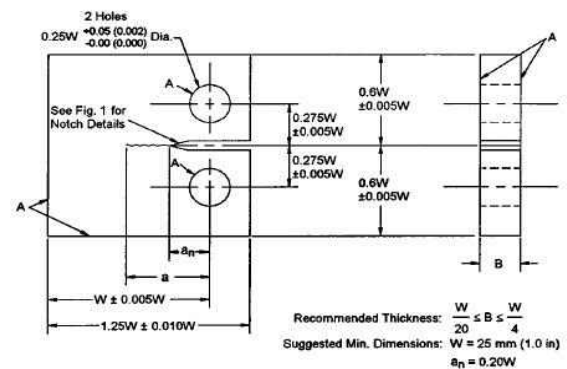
CT specimen for the fatigue crack growth test
